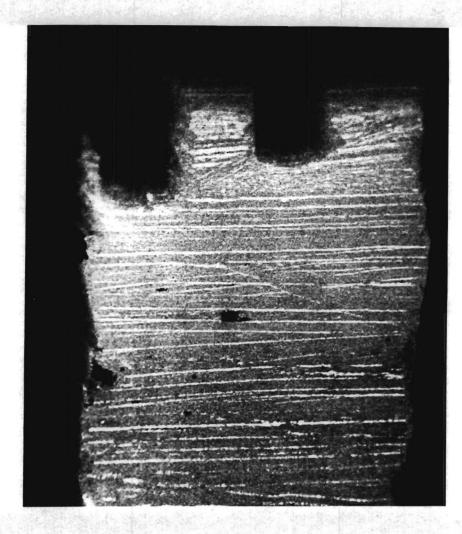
Photograph of a straight walled and concave floored kerf formed by a raker set hacksaw (18 teeth per inch).
